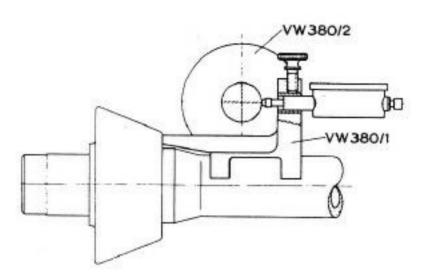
Gauge holder placed against pinion face with dial indicator pin against mandrel.
